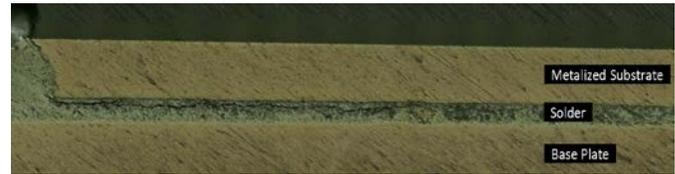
Cross-sectional image of crack in the solder joint.
